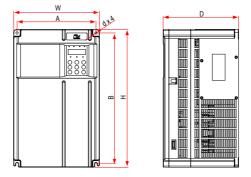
Mounting Dimensions of MD500ET18.5G(B) to MD500ET37G(B)
